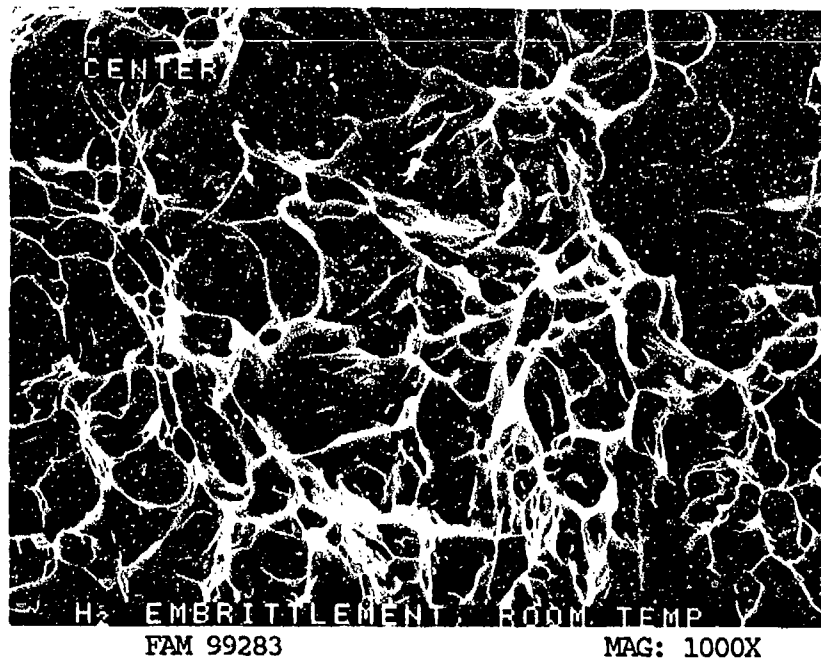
Dimpled overstress in the center of the fracture surface.
